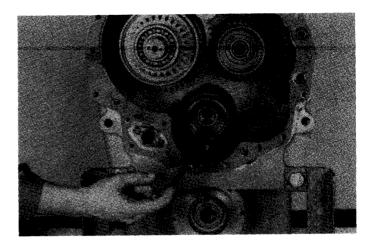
Remove fourth speed clutch disc hub retainer ring.
